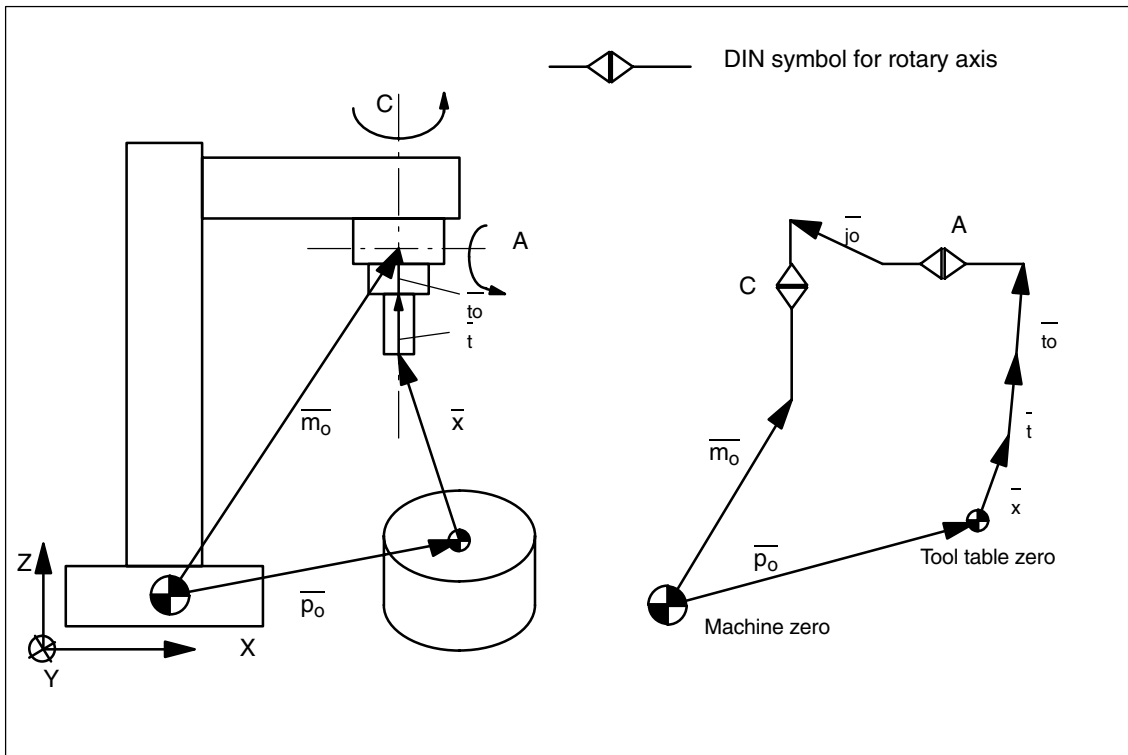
Schematic diagram of CA kinematics, moved tool
